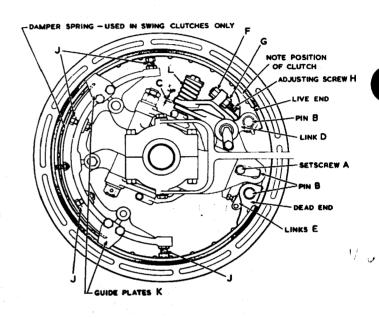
Driving Clutch Adjustment and Reversing Clutch Band
